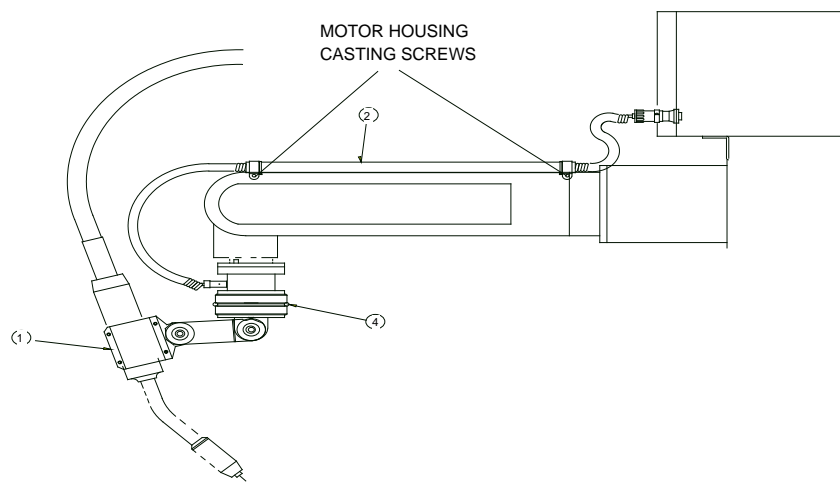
Mounting the P-Clamp and Conduit Assembly
